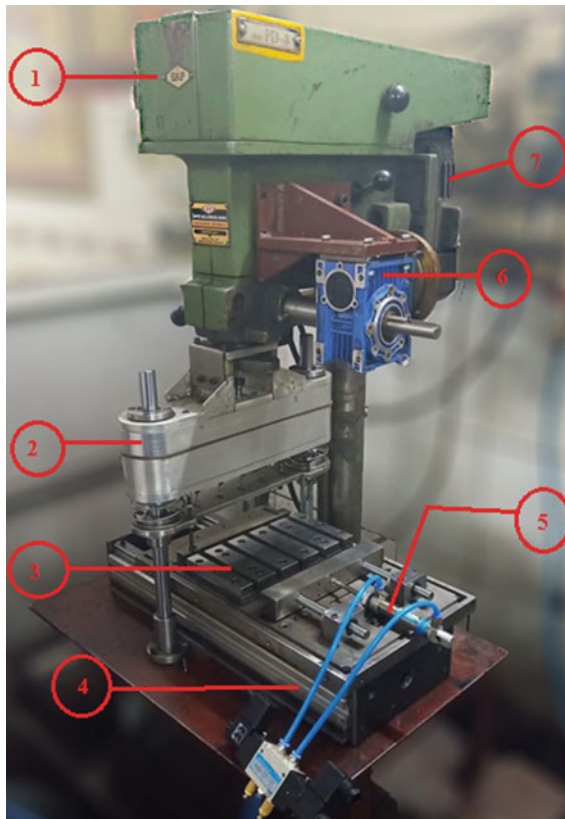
Conventional pillar drilling machine arrangement view with multi-spindle gearbox. 1—pillar-type drilling machine, 2—multi-spindle drilling head, 3—drilling fixture, 4— x -axis travel lead screw table, 5—pneumatic clamping, 6—worm gearbox, 7—0.75 HP motor
